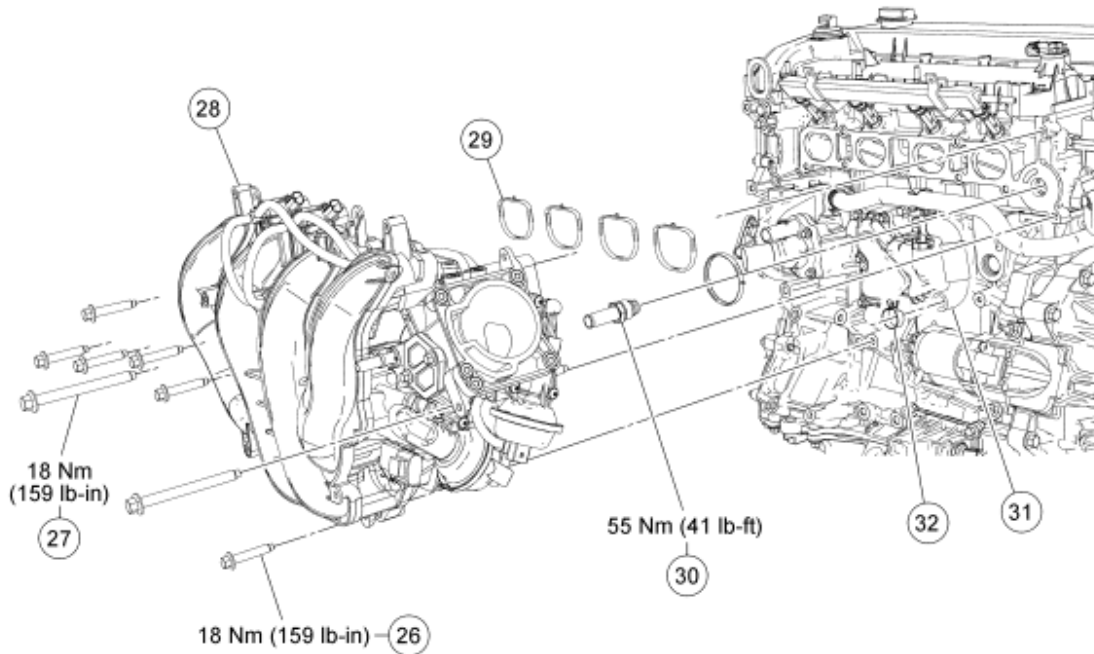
Exploded View Of Intake Manifold With Torque Specification (3 Of 4)
